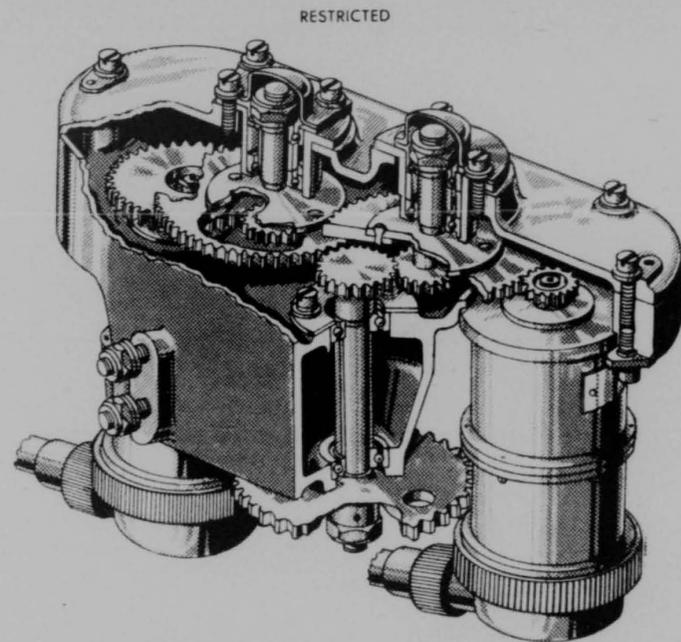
Cutaway View of Azimuth Selsyn Units, Showing Gears, Shafts, and Bearings.
